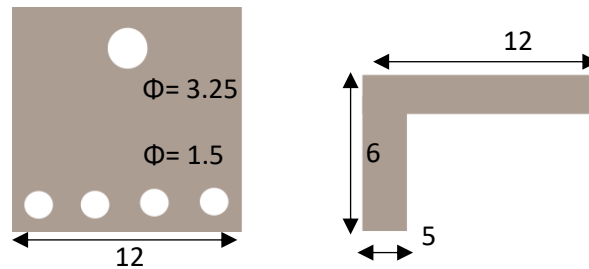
Schematic of the top (left) and side (right) view of the contact holder with dimensions in mm.
